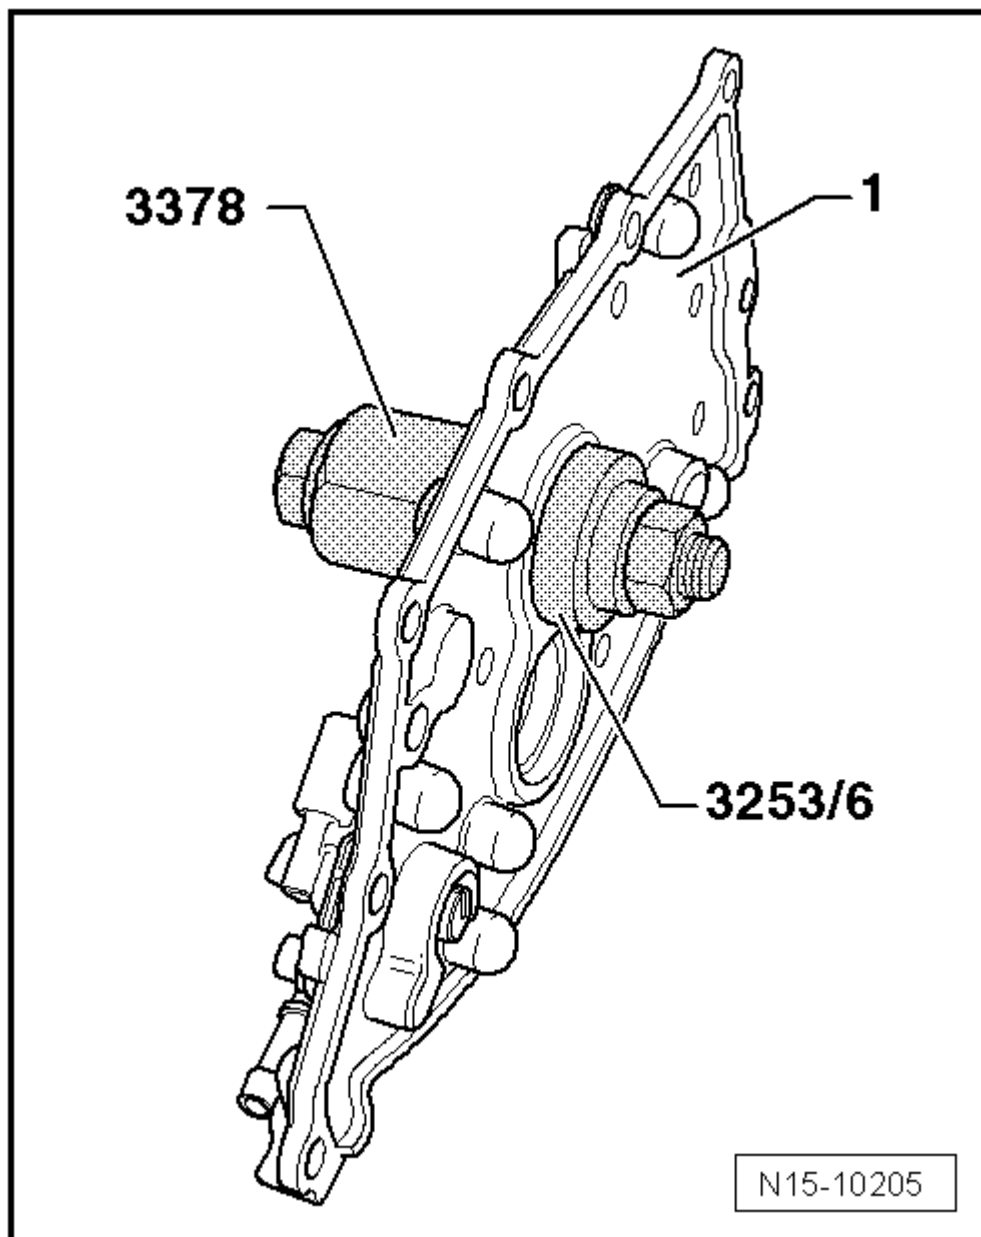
Installing Sealing Ring Using Seal Installer 3378 Into Cover Piece And Pulling In Flush Using Seal Installer 3253/6 From Assembly Tool 3253
